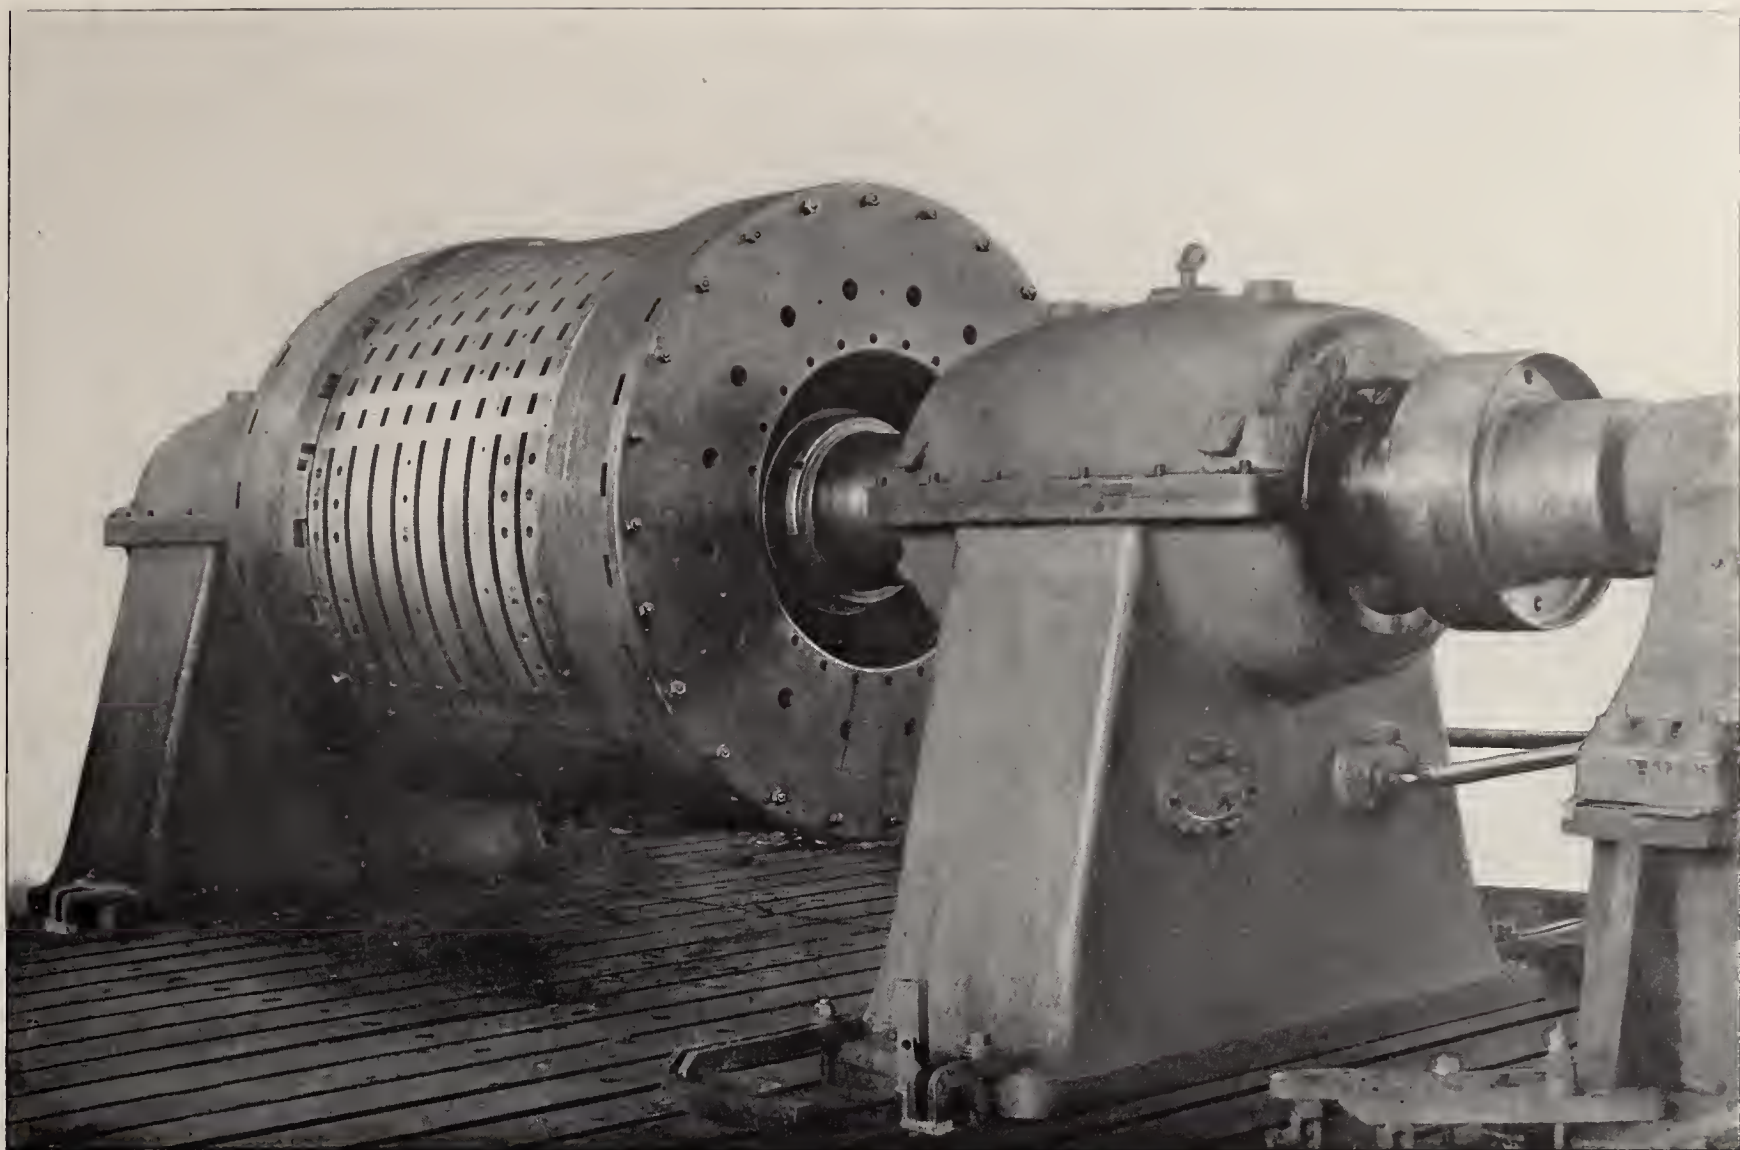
THE ROTATING FIELD—THE MOST INTERESTING PART OF THE MACHINE
